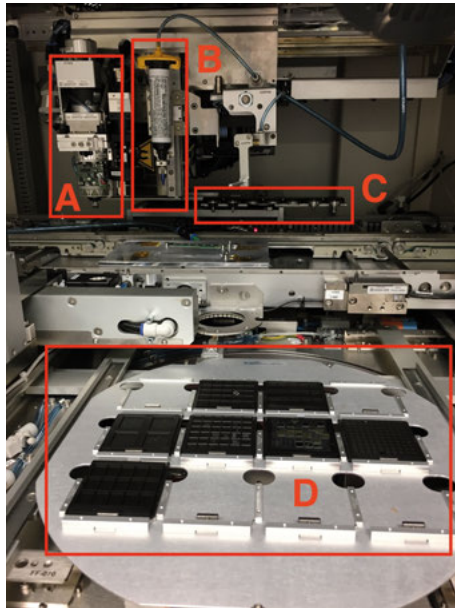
Example of a DATACON pick-and-place machine, which was also used at NOTE for prototyping. A pick-up tool (A) is used for the ASIC (D) lift-up and placement. A glue dispensing system (B) is available in the machine, while a holder for replacement tools (C) can also be used if necessary. The hybrid sits in the center of the picture. The photo has been taken from the ITk Strip end-cap assembly procedures documentation.
